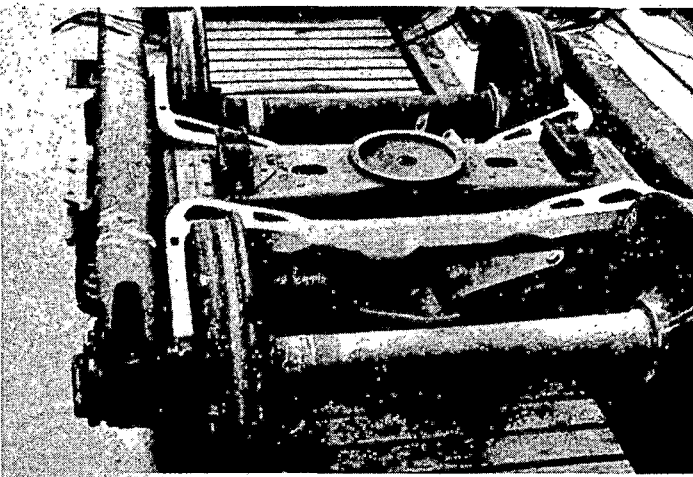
DRESSER DR-1 STEERING ASSEMBLY
